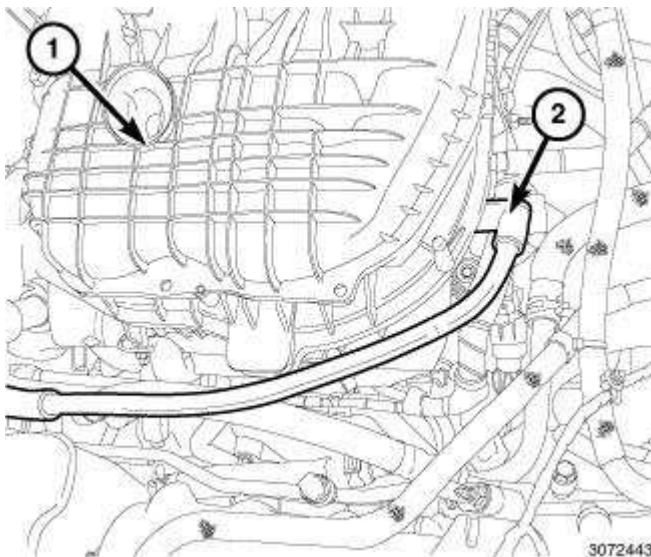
Fresh Air Makeup Hose At Rear Of Intake Manifold
